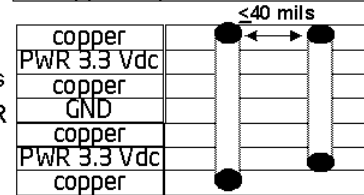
Trace Transitioning Layers and Crossing Plane Splits
